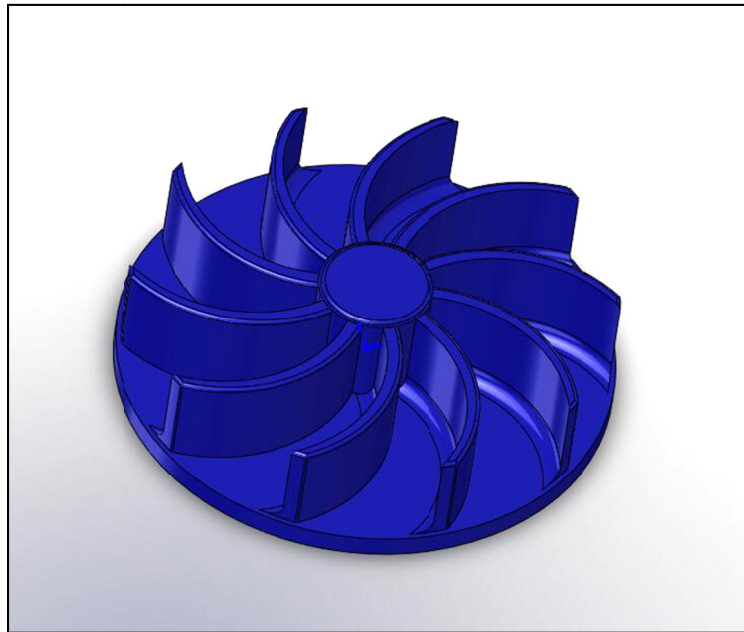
Physical model/geometry of the selected product – A pump impeller.
